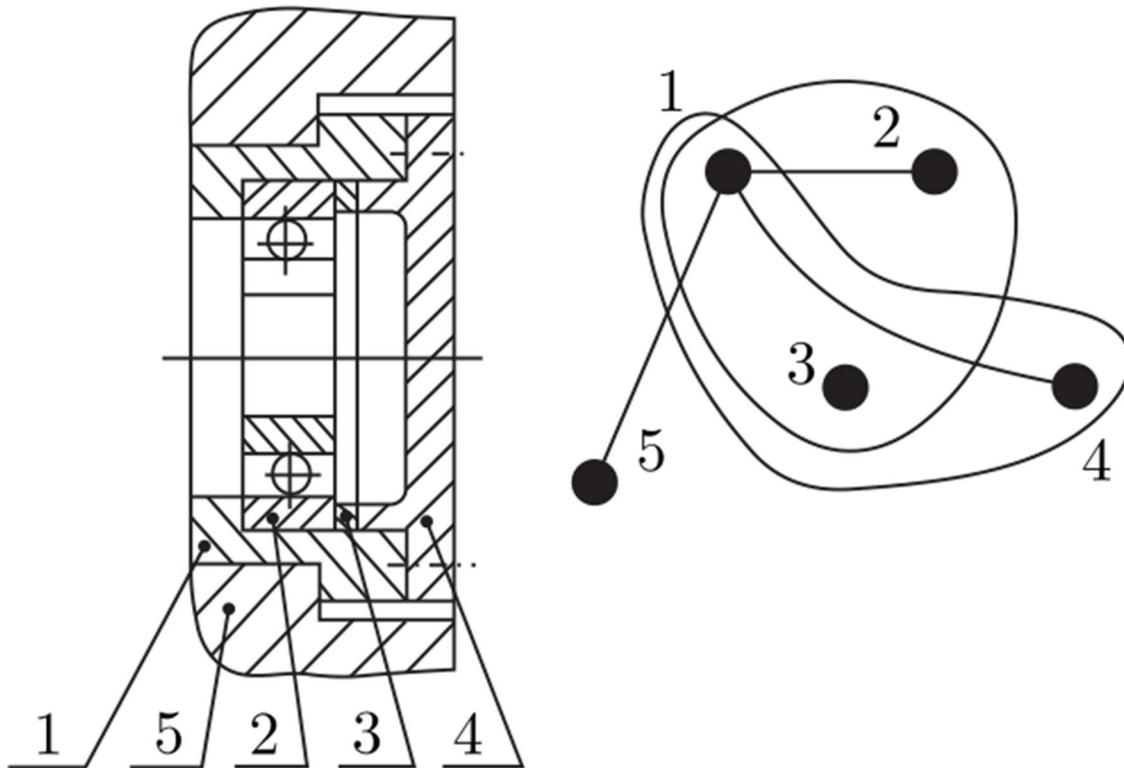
Bearing mounting structure with relocation (a), redundant hypergraph describing the mechanical structure of this structure (b)
